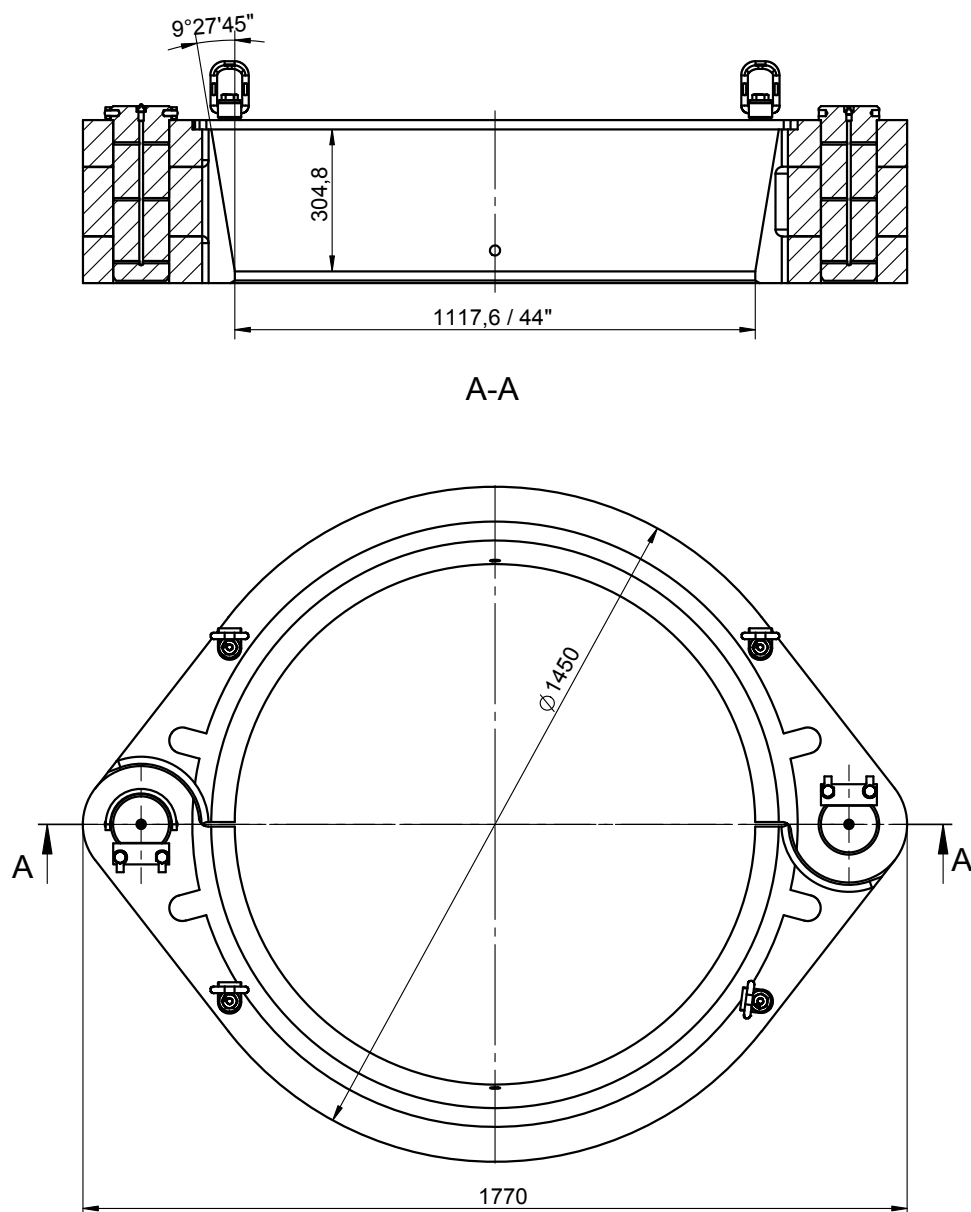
Principle drawing of a HCS 200-42" main dimensions
